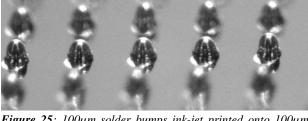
100μm solder bumps ink-jet printed onto 100μm pads on 250μm centers at 400 per second.
